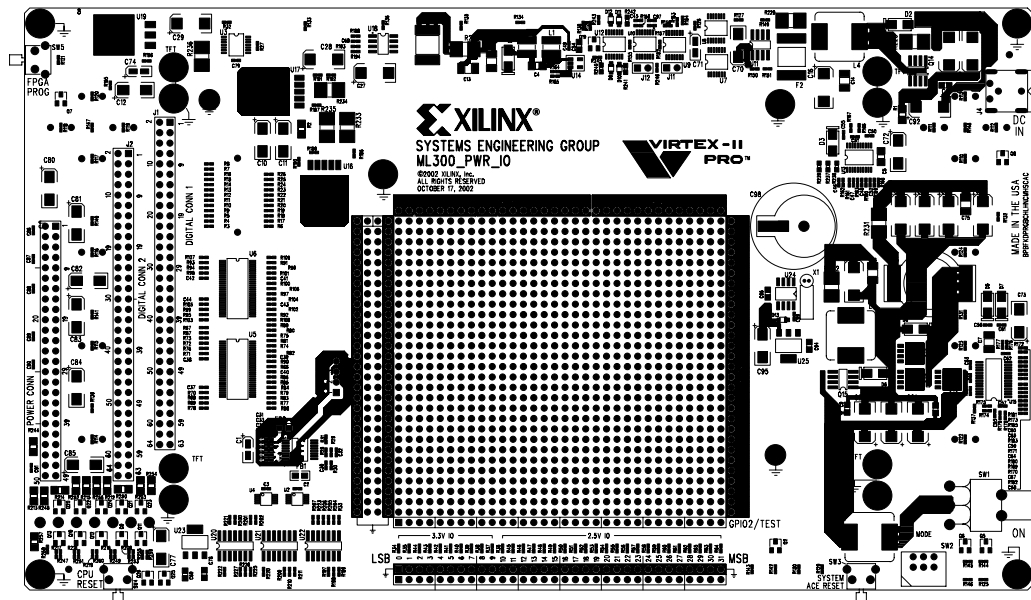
Bottom Side of the ML300 Power I/O Board
